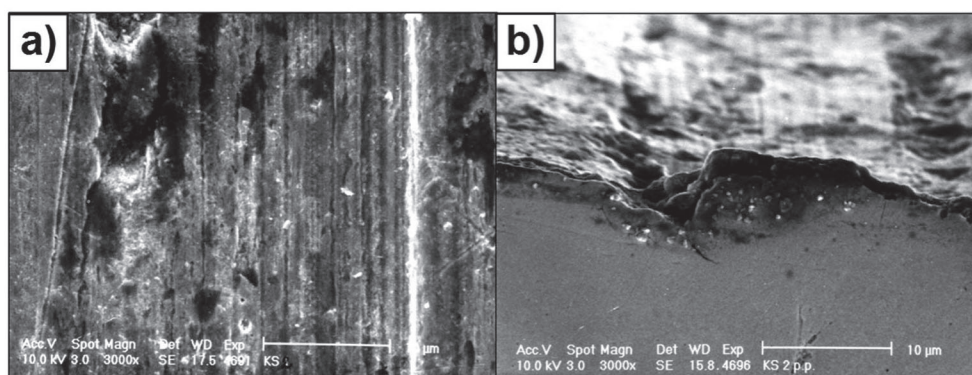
Stereometric image (a) and structure of the surface layer (b) of the surface with a ball sliding burnishing $F = 1.2 \text{ kN}$, $R_k = 9.25 \text{ mm}$ after wearing on a distance of 9,500 m
